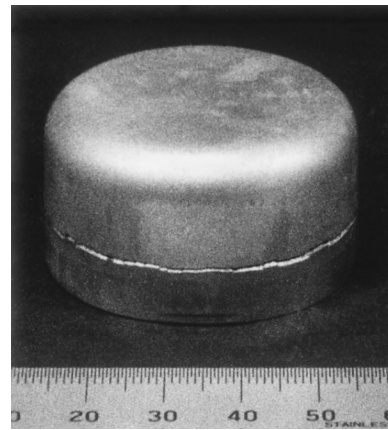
Fracture at sidewall in deep drawing test of the two-ply laminate in case where the SPCC layer is set on the punch side ( $d_0 = 70$  mm).
